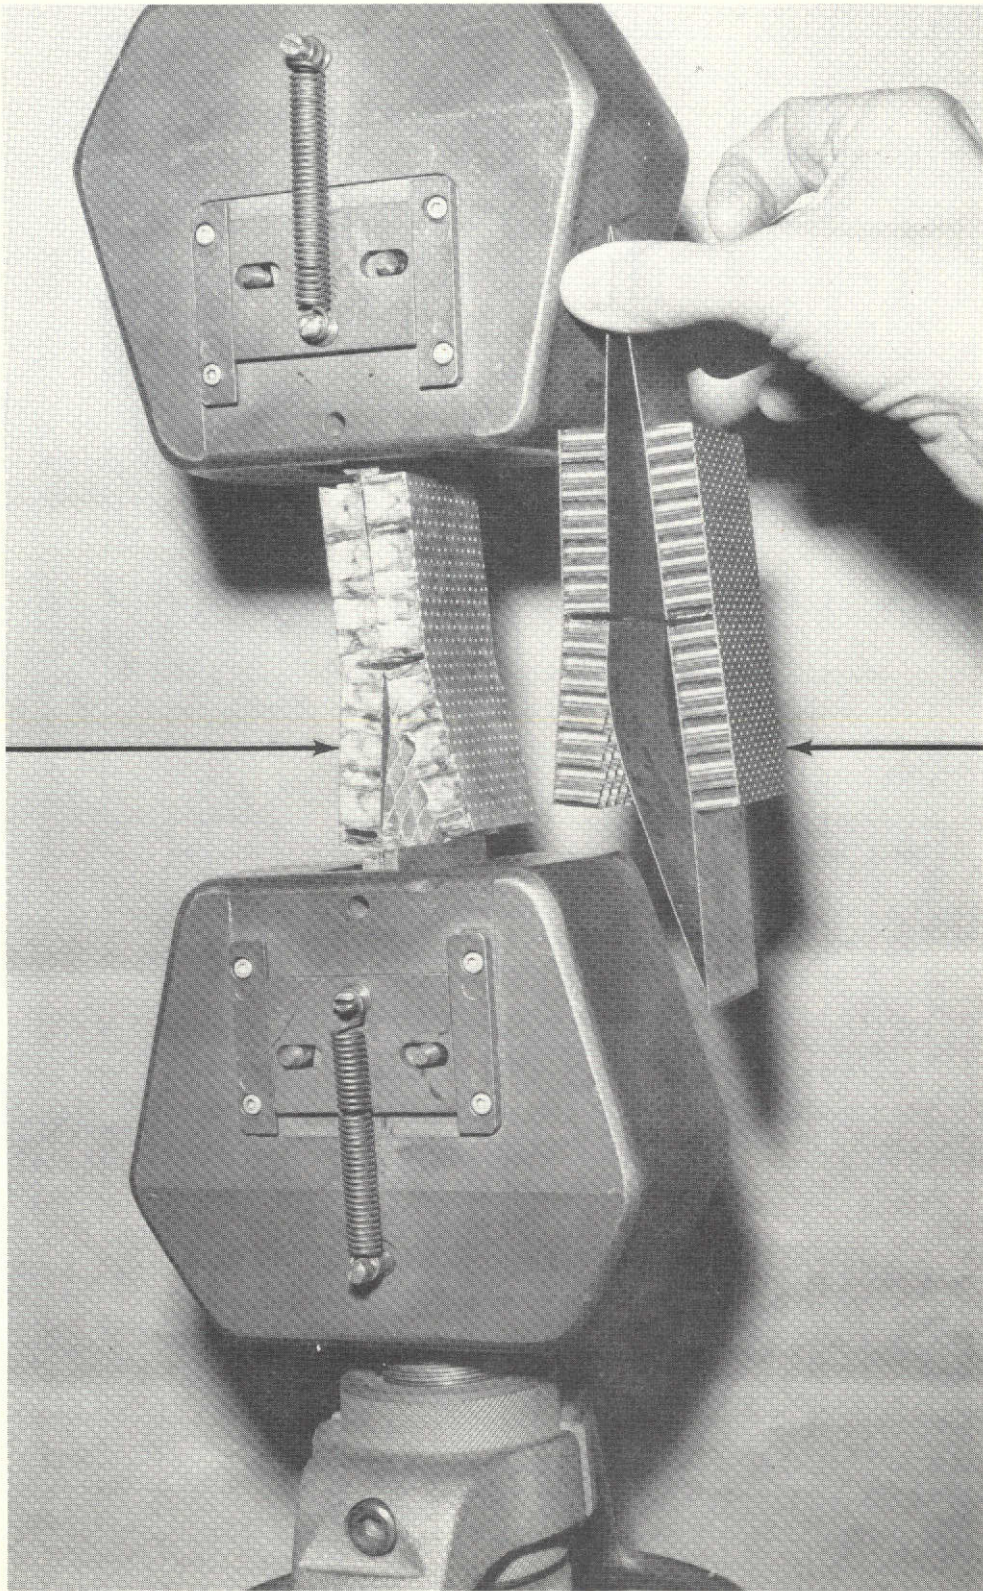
SHEAR SPECIMEN STATIC TEST FAILURES
